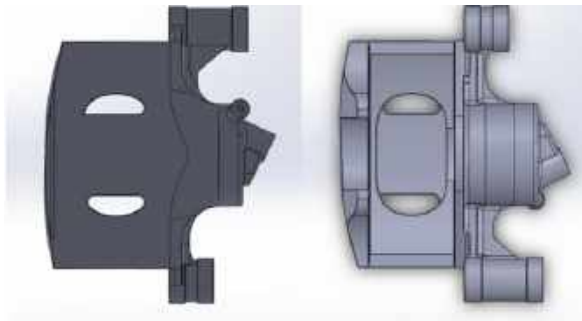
Brake caliper 3D model of Mitsubishi Galant.
